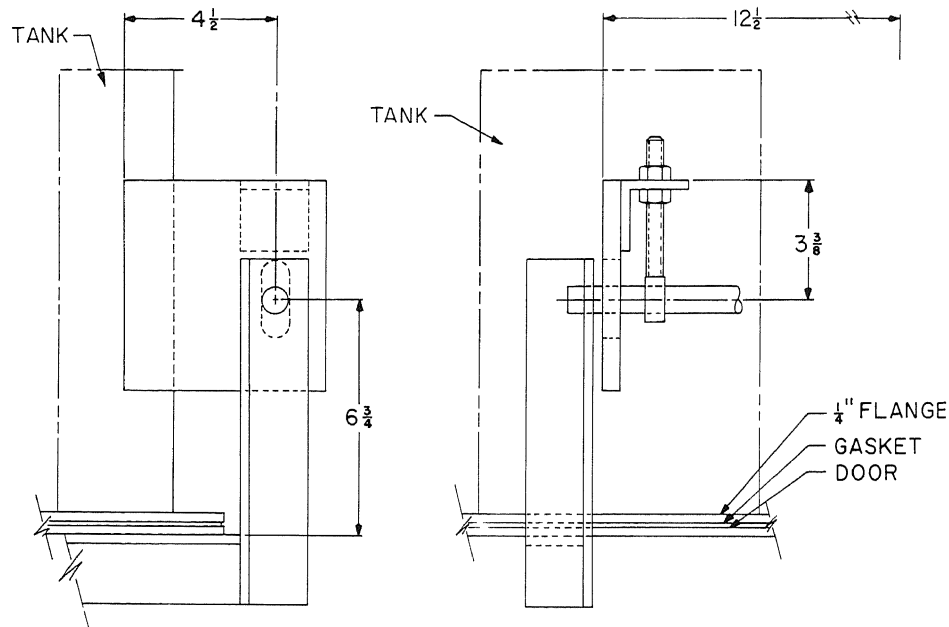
Hinge details of receiver door. Dimensions are in inches.
